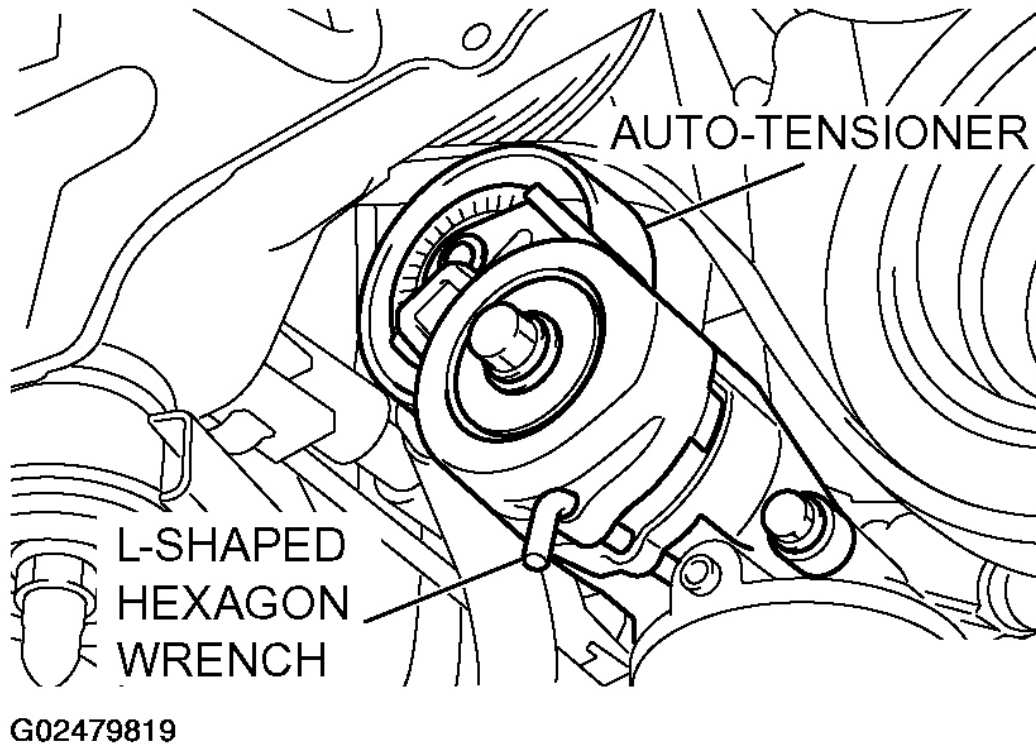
Inserting L-Shaped Hexagon Wrench Into Hole
